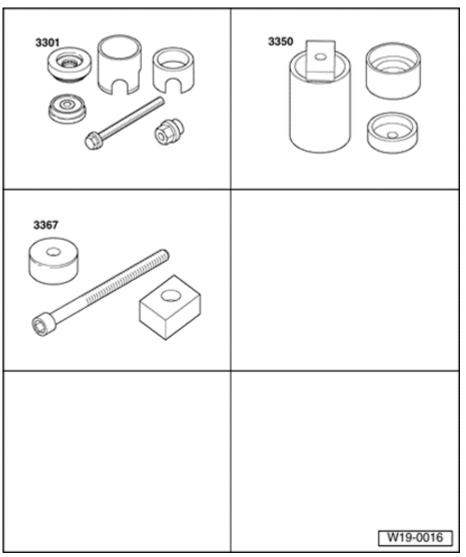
Identifying Special Tools - Viscous Fan Clutch Bushing, Removing And Installing Courtesy of VOLKSWAGEN UNITED STATES, INC.
